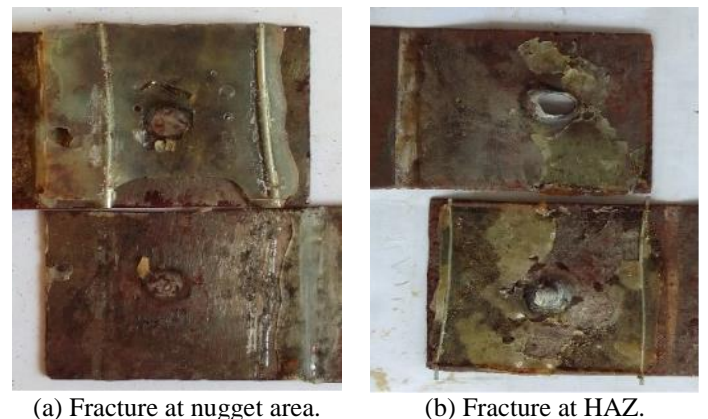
Fracture of the hybrid spot welding-epoxy adhesive (SWAB) specimens.
